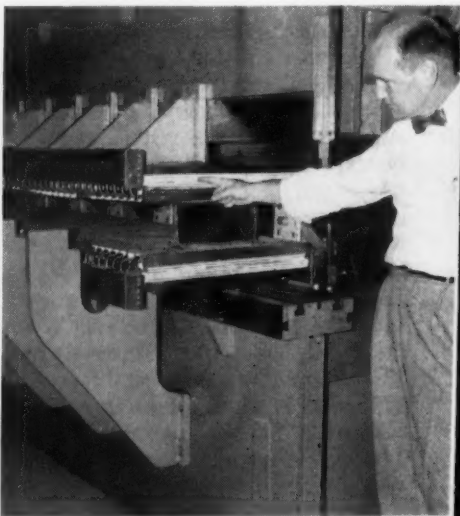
View showing details of structures used to mount heated platens on press brake.
